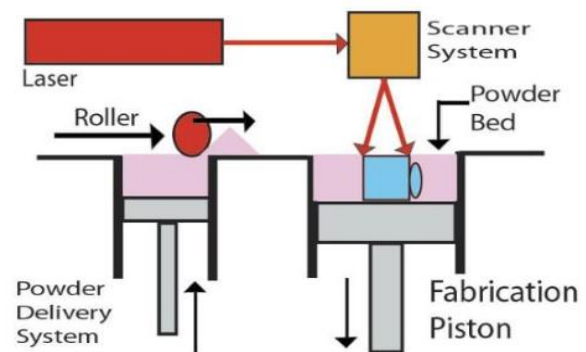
Selective Laser Sintering SLS 3D Printing [46]
